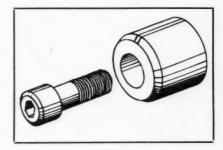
Drawing of a button type jig support designed for attachment by means of socket head screws.
